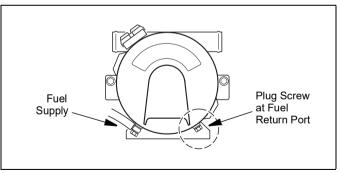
Fuel Return Plug Screw at a Single-Pipe System
